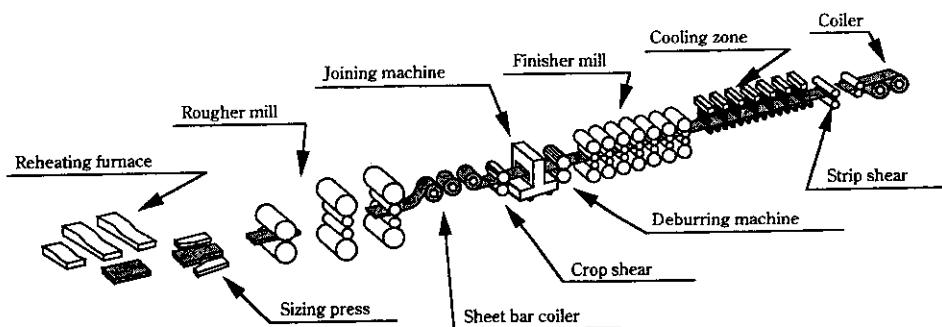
Layout of No. 3 hot strip mill in Chiba Works
